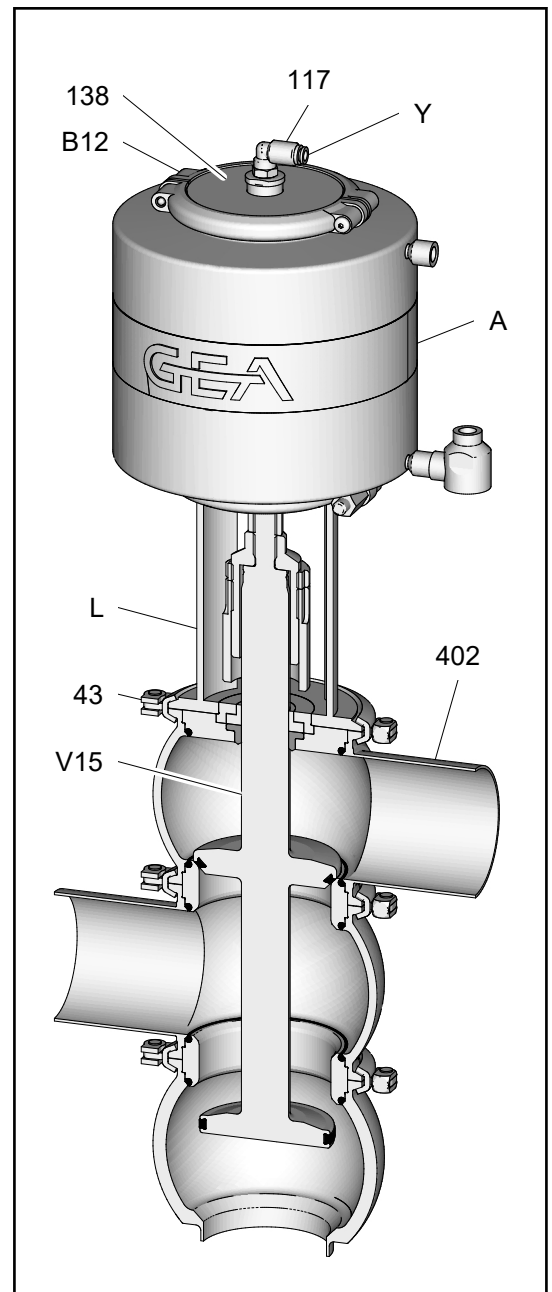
Valve with connection 0 [angled push-in fitting (W)]
